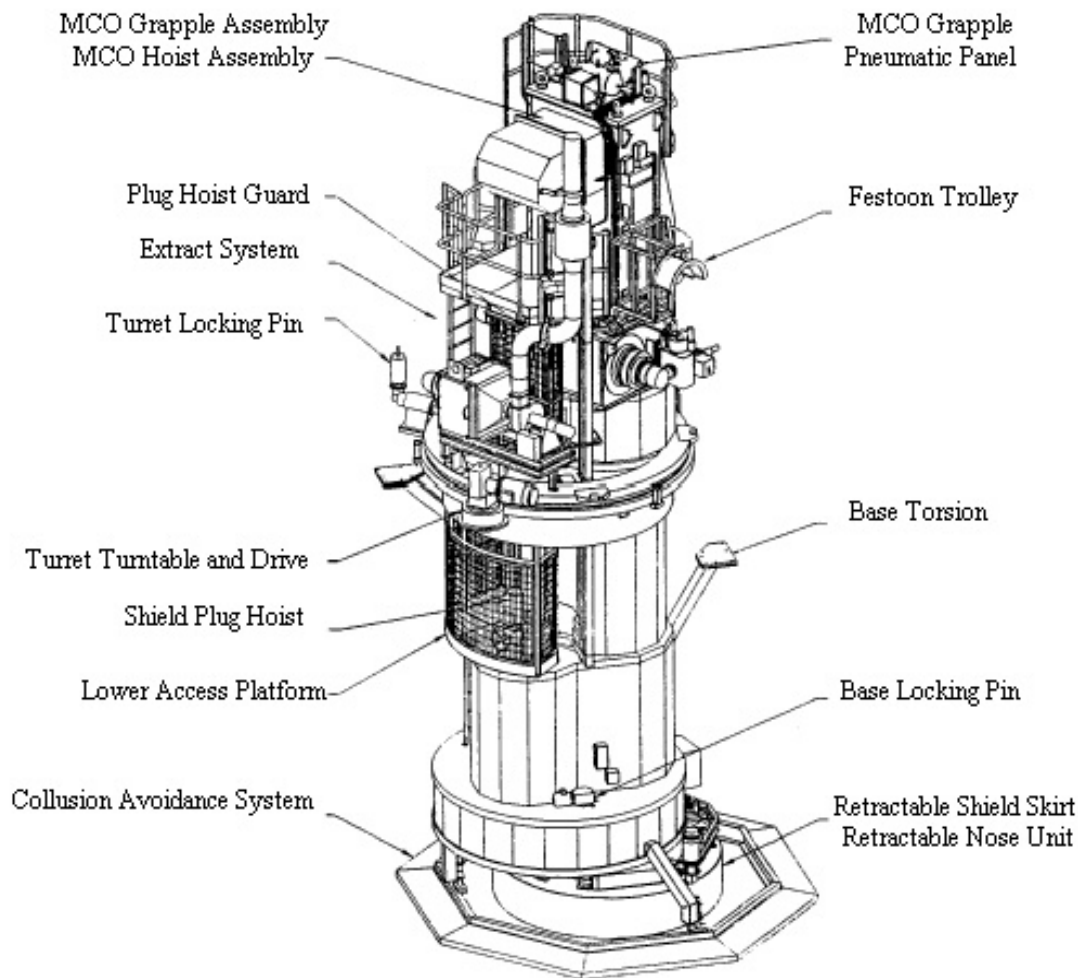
Cask Turret Assembly of Multi-canister Overpack Handling Machine
